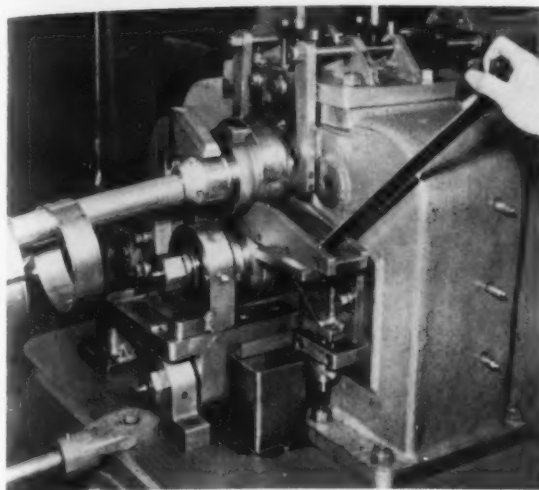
Brake band blanks, with ends punched and pre-formed, are transformed into rings by this set of Tishken rolls.
